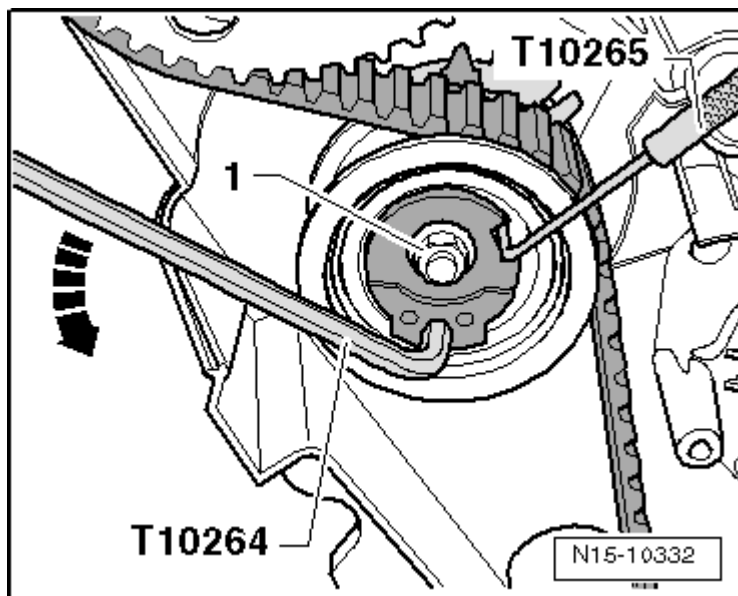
Identifying Long Reach T10264 And Locking Tool T10265
